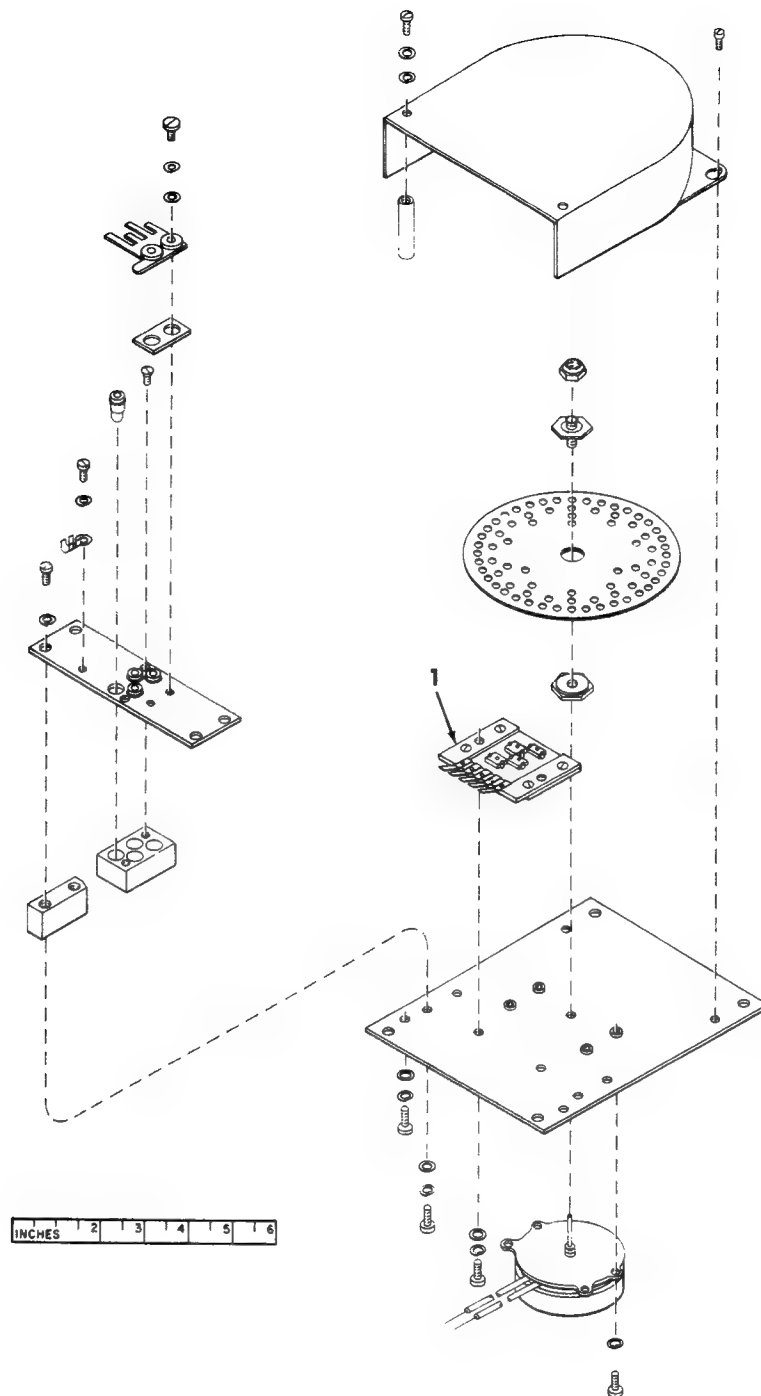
Generator, pulse O-300A/M (9000007)—partial exploded view
